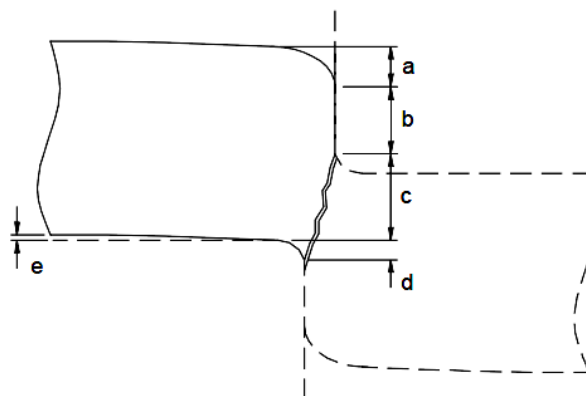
Main parts of a sheared part: a- rounding zone, b – sheared zone, c- fractured zone, d- burr, e – warp [8].
